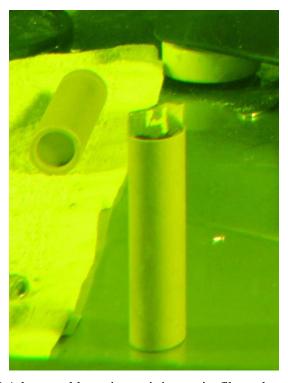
A laser weld specimen sitting on its fiber tube container
